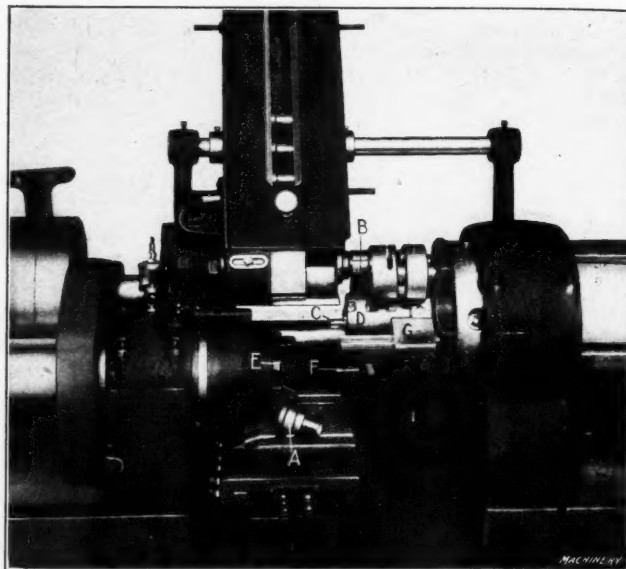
Cleveland Standard Model Turret Machine equipped with Magazine for Turning Part shown at A, Fig. 1
